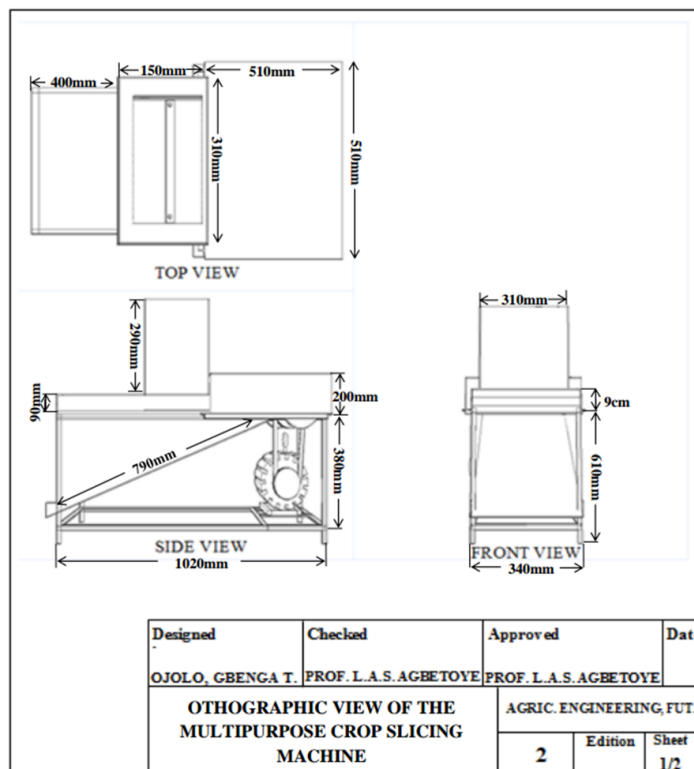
Autographic projection of the multipurpose crop slicing machine
